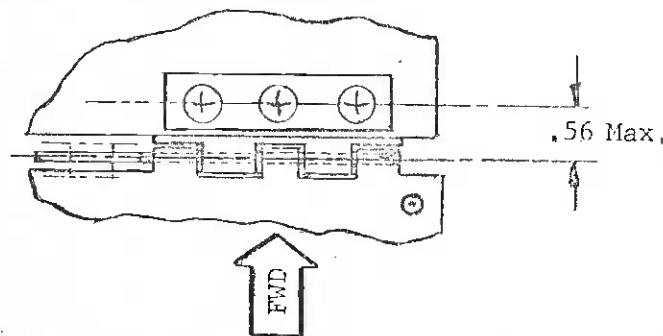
ELEVATOR TRIM TAB HINGE INSPECTION
